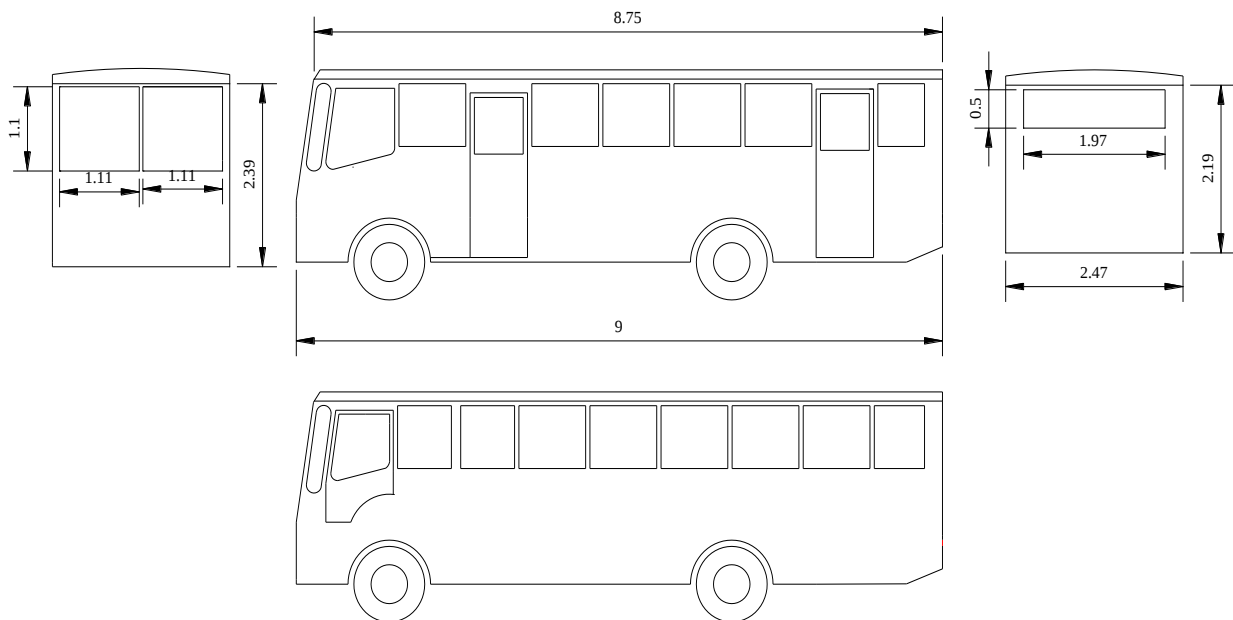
Schematic view and dimensions of ISUZU FSR bus
